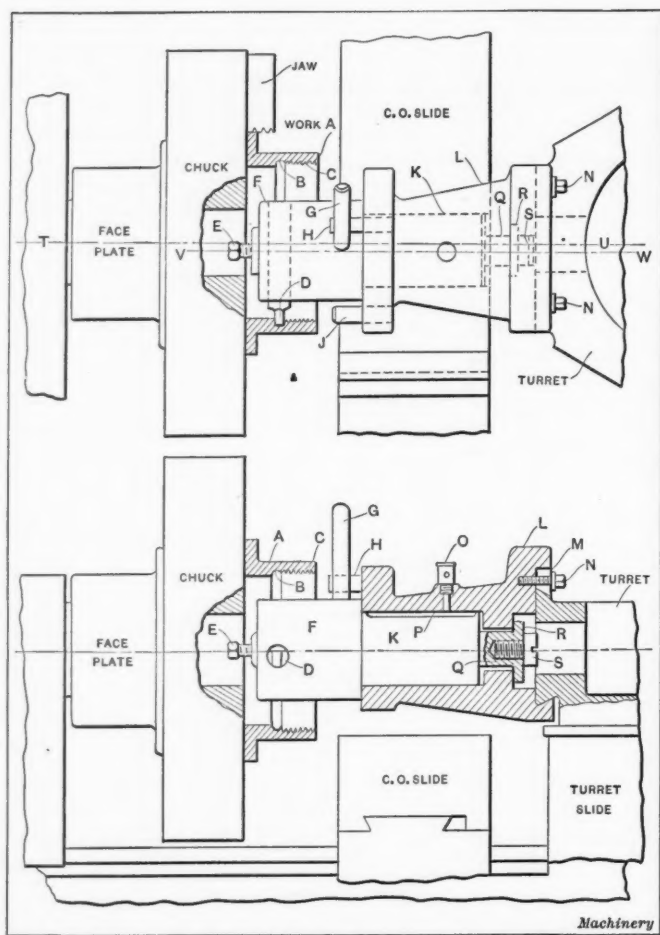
An Eccentric Recessing Tool for the Turret Lathe
